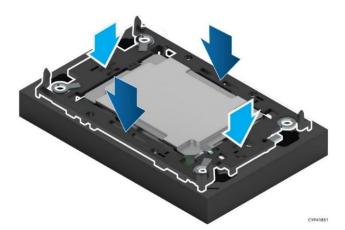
Installing Processor Carrier Clip onto Processor – Part 2
